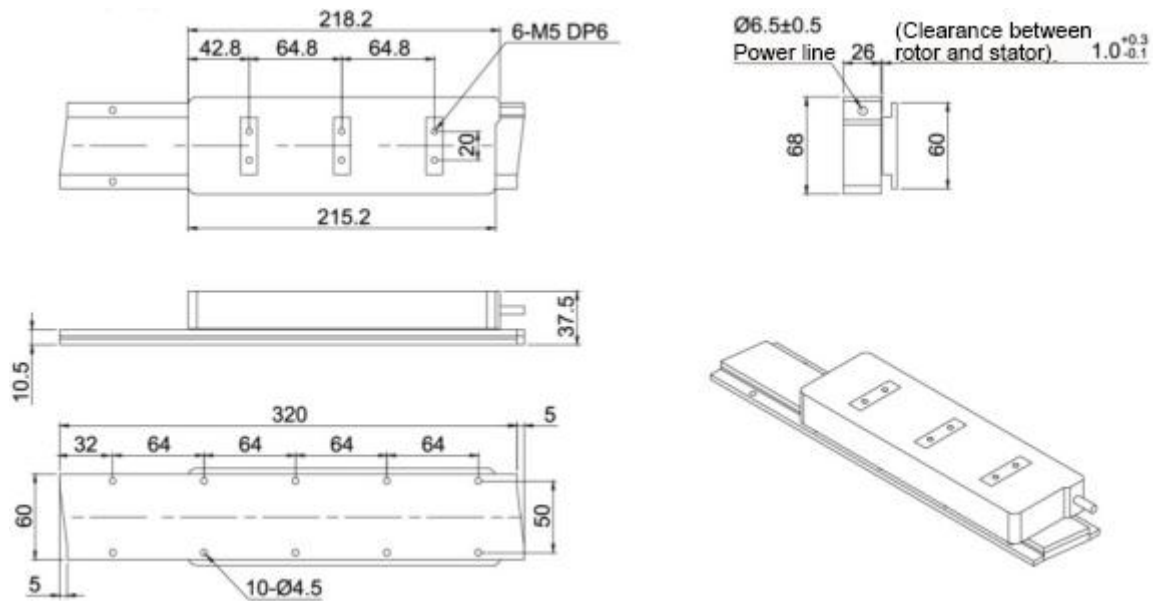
Dimensional drawing of WZCR-AZ45C3-□ motor
